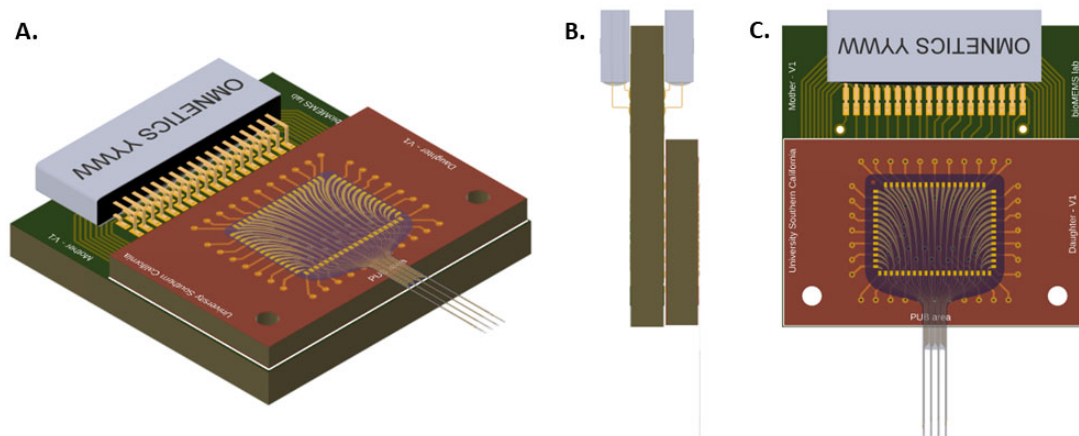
3D model of packaged Parylene C MEA showing the Daughter and Mother PCBs
